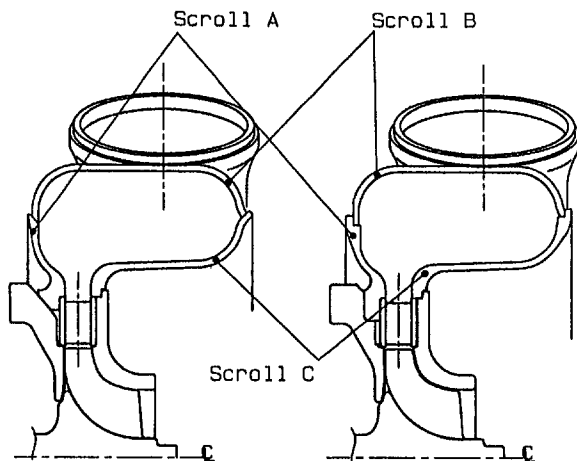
(a) Initial design for scroll (taper butt joint); (b) final design for scroll (faucet fitup)
